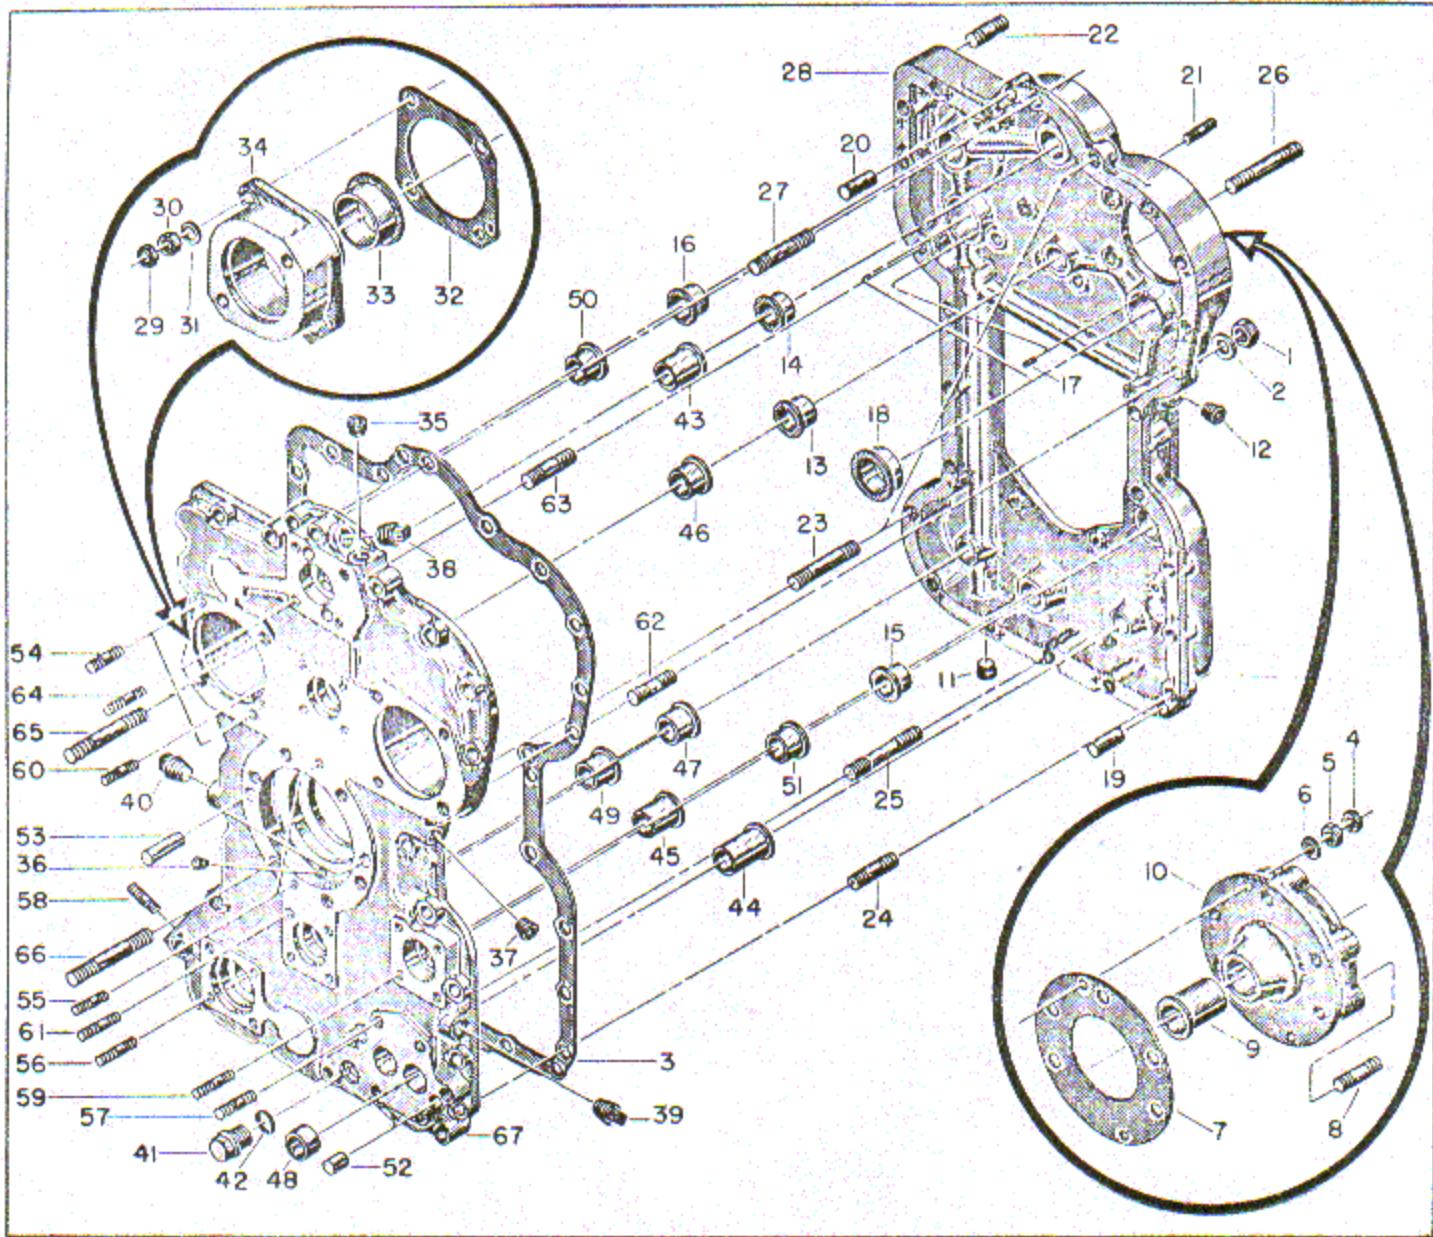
Exploded Parts View of O-470-11 Front and Rear Accessory Case Machining Assembly
